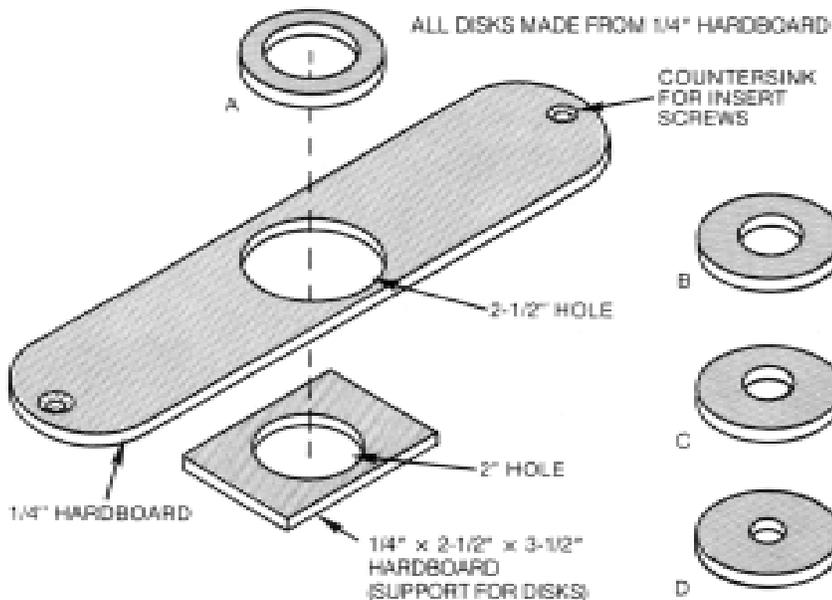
Make the special insert and drill the mounting holes by using a drum sander insert as a pattern. All disks have a 2-1/2" outside diameter and: (A) a 1-5/8" inside diameter; (B) a 1-1/8" inside diameter; (C) a 7/8" inside diameter; or (D) a 5/8" inside diameter.
